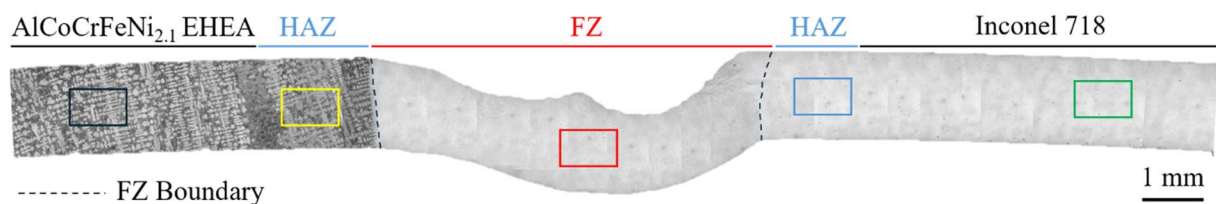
Overview of the optical microscopy performed on the AlCoCrFeNi_{2.1} EHEA/ Inconel 718 welded joint cross-section.
